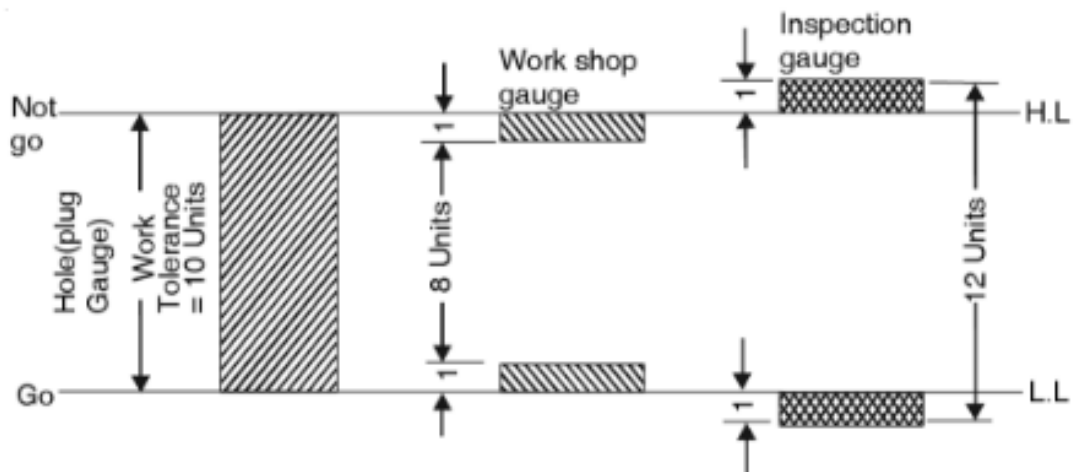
Tolerances of Workshop and Inspection Gauges.
